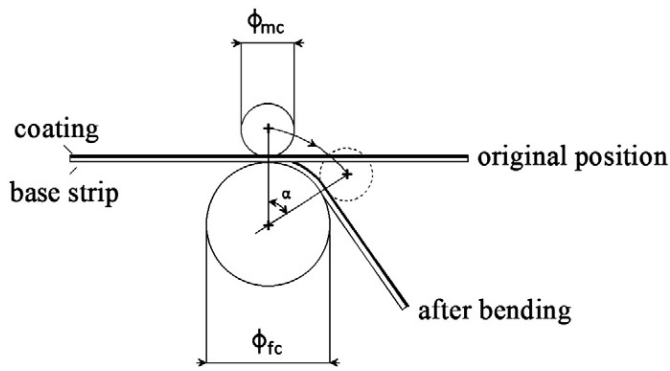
(a) Schematic illustration of bending test used to induce cracks in film deposited on metallic strip. ϕ_{mc} and ϕ_{fc} are the diameters of moving and fixed cylinder, respectively.
